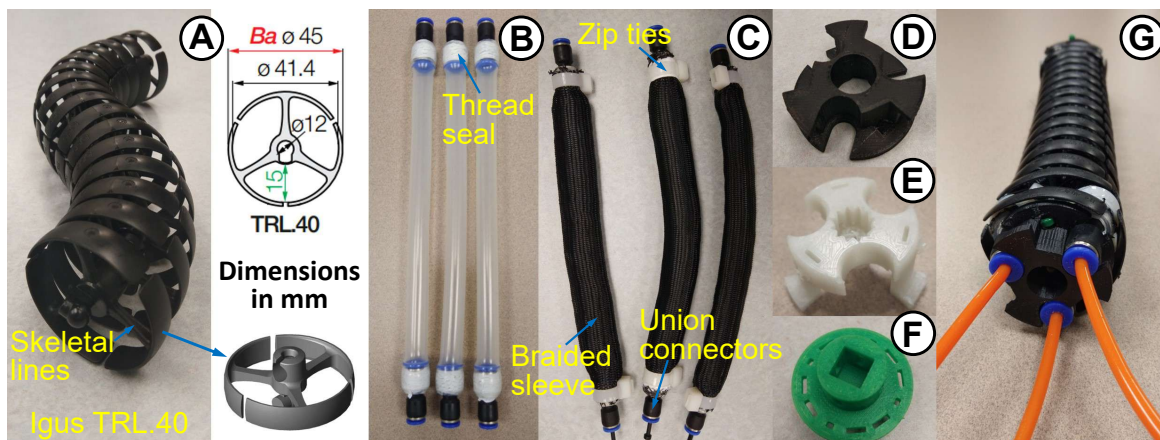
Design components of the soft module – (A) Igus Triflex R-TTL.40 dress pack, (B) silicone tubes, (C) PMAs, (D) end caps, (E) intermediate joint, (F) upper hip joint. (G) Fabricated prototype of the soft module.
